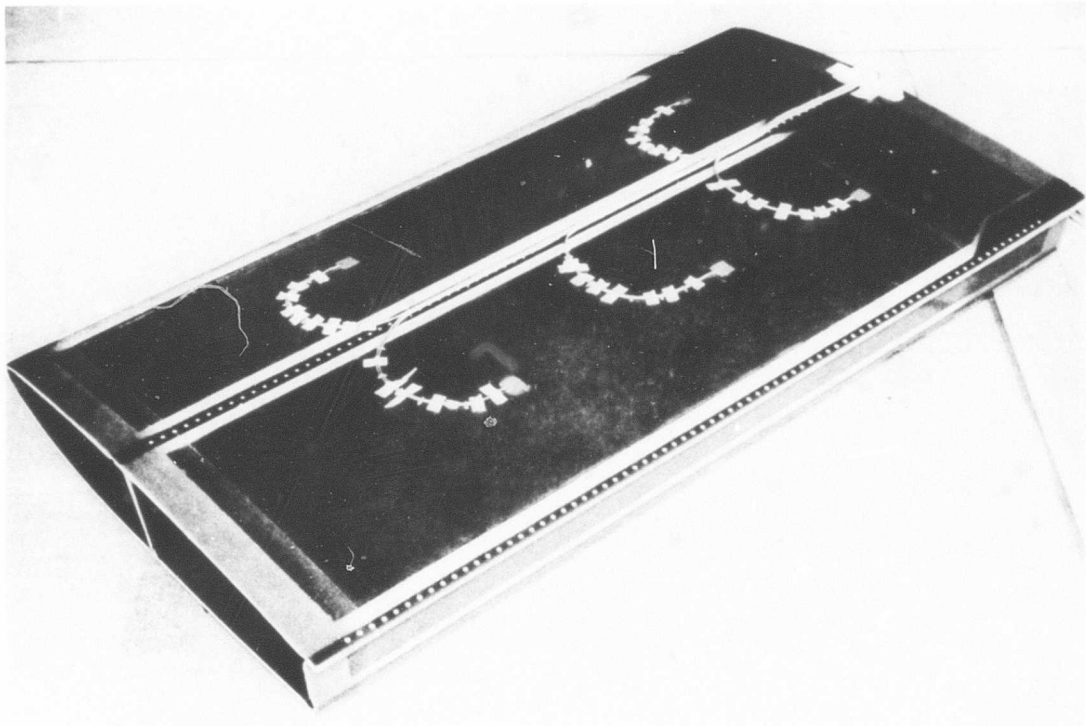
Lower Surface of the No. 1 FRP Wing Section.
